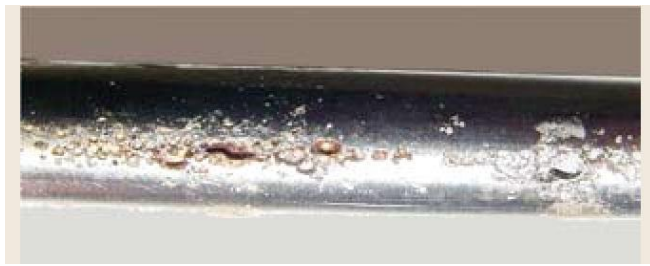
Pitting corrosion of the tubing [10]
